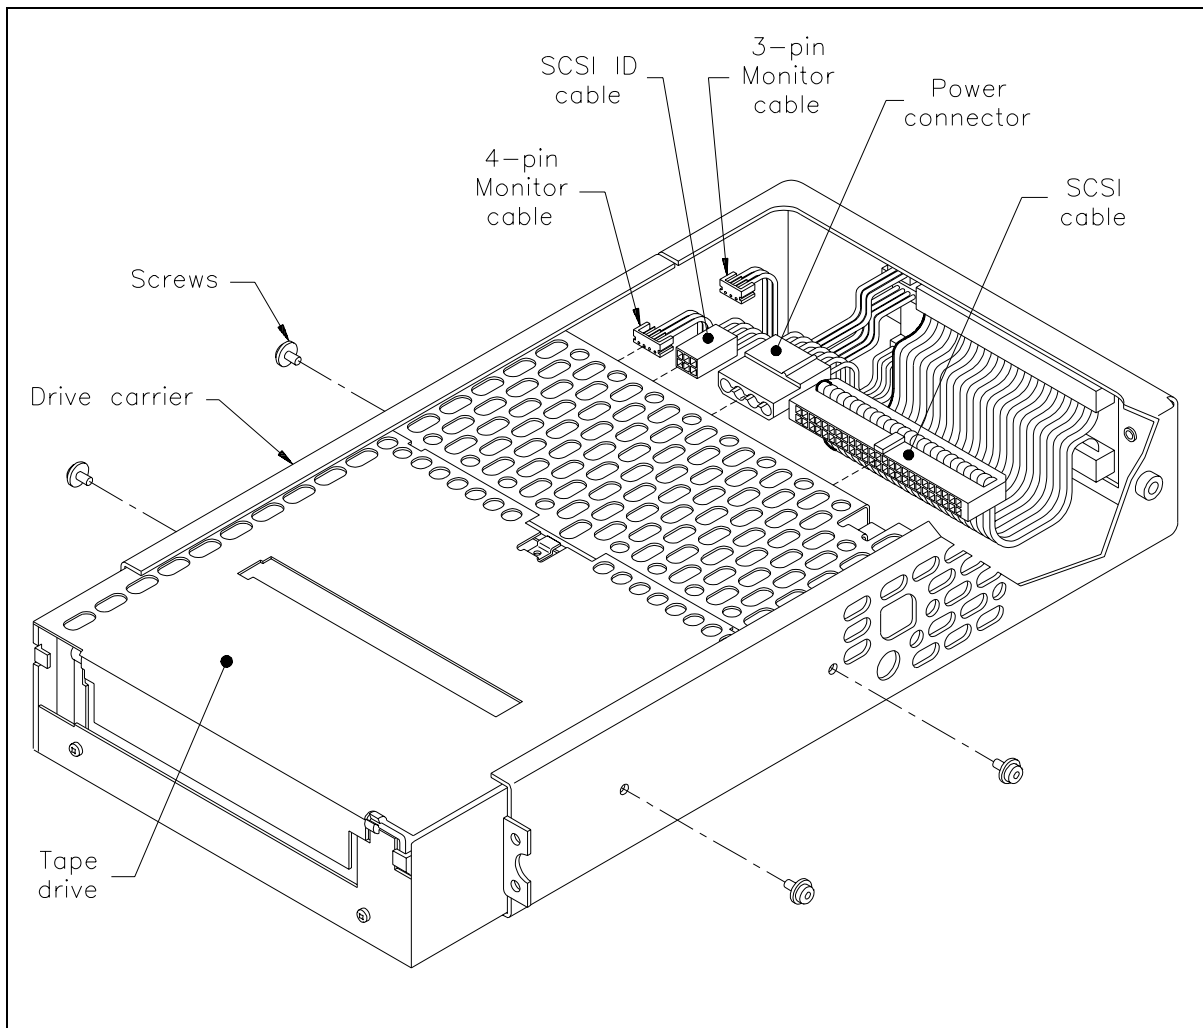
Connecting cables to the 8mm tape drive (narrow SCSI cable shown)
